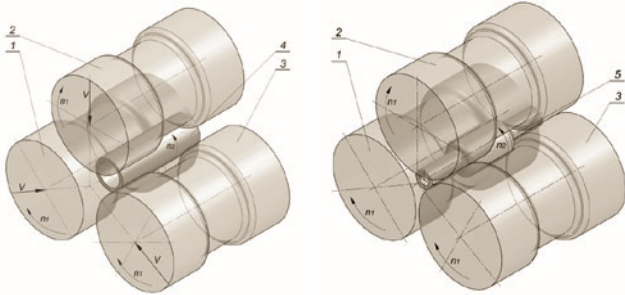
Design of the rotary compression process for producing axisymmetric hollow part in which three tools perform rotary motion, moving simultaneously towards billet axis: 1, 2, 3 – forming rollers, 4 – billet (tube section), 5 – part; a) process start, b) process end
